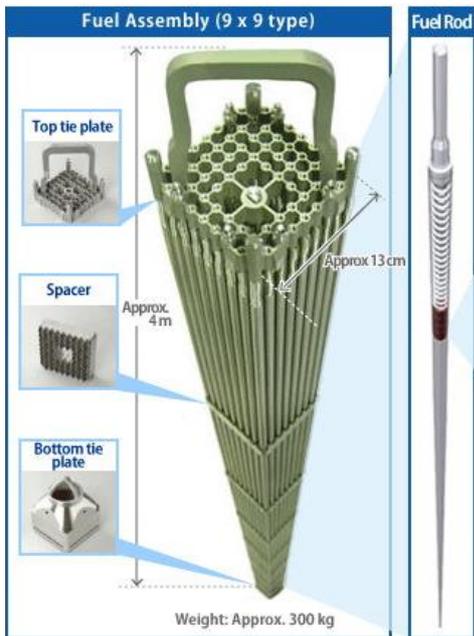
Fuel assemblies and fuel rods (or fuel pins)
